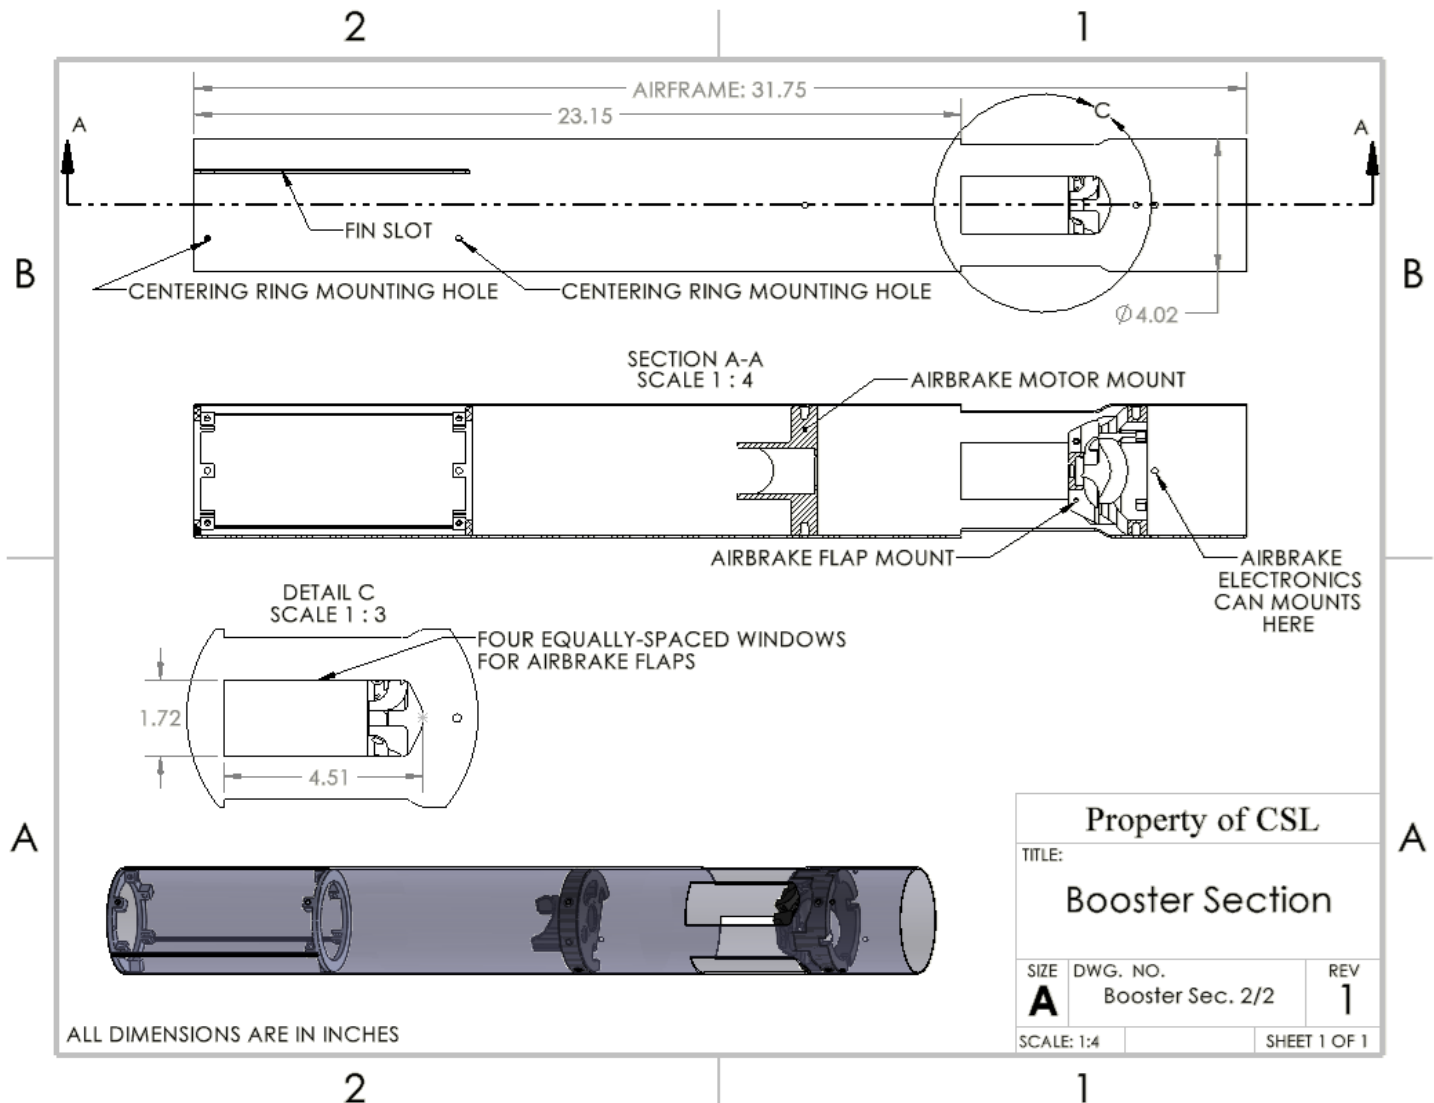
Dimensioned CAD schematic of the aft segment of the booster, with fins, motor tube, fasteners, and airbrakes removed for clarity.
